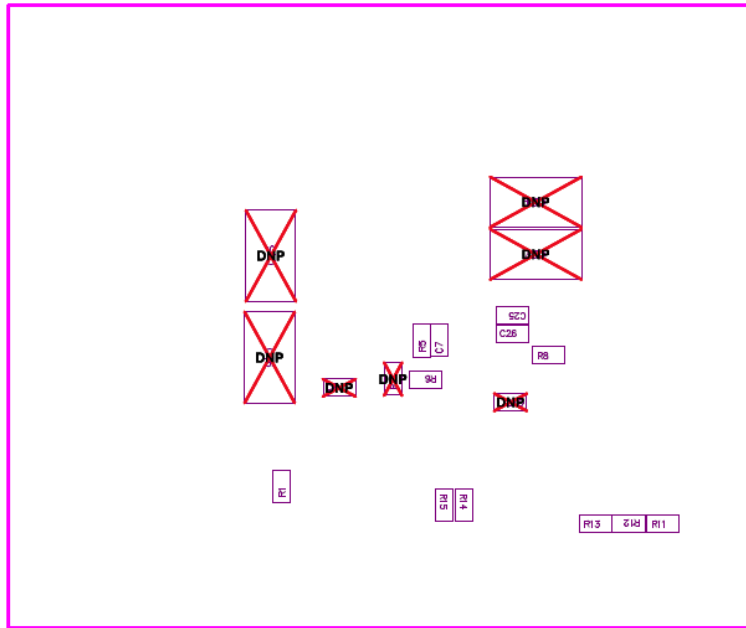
TPS53515EVM-587 Bottom-Layer Assembly Drawing
